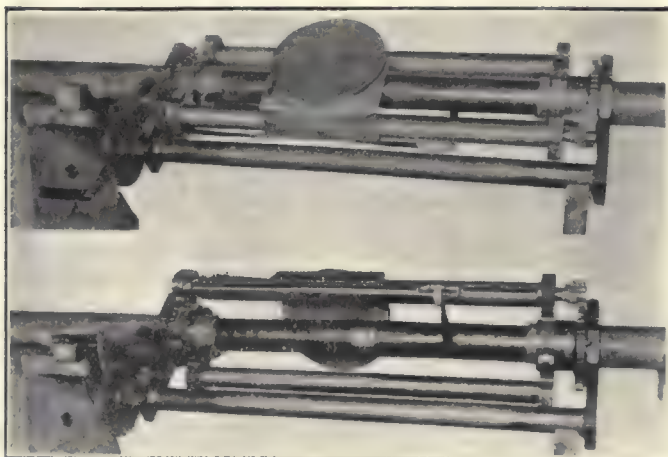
THE 24-IN. TAPE-WRAPPED JOINT IS BUILT UP BY THIS MACHINE, WHICH IS SMALL ENOUGH TO OPERATE IN A STANDARD MANHOLE
